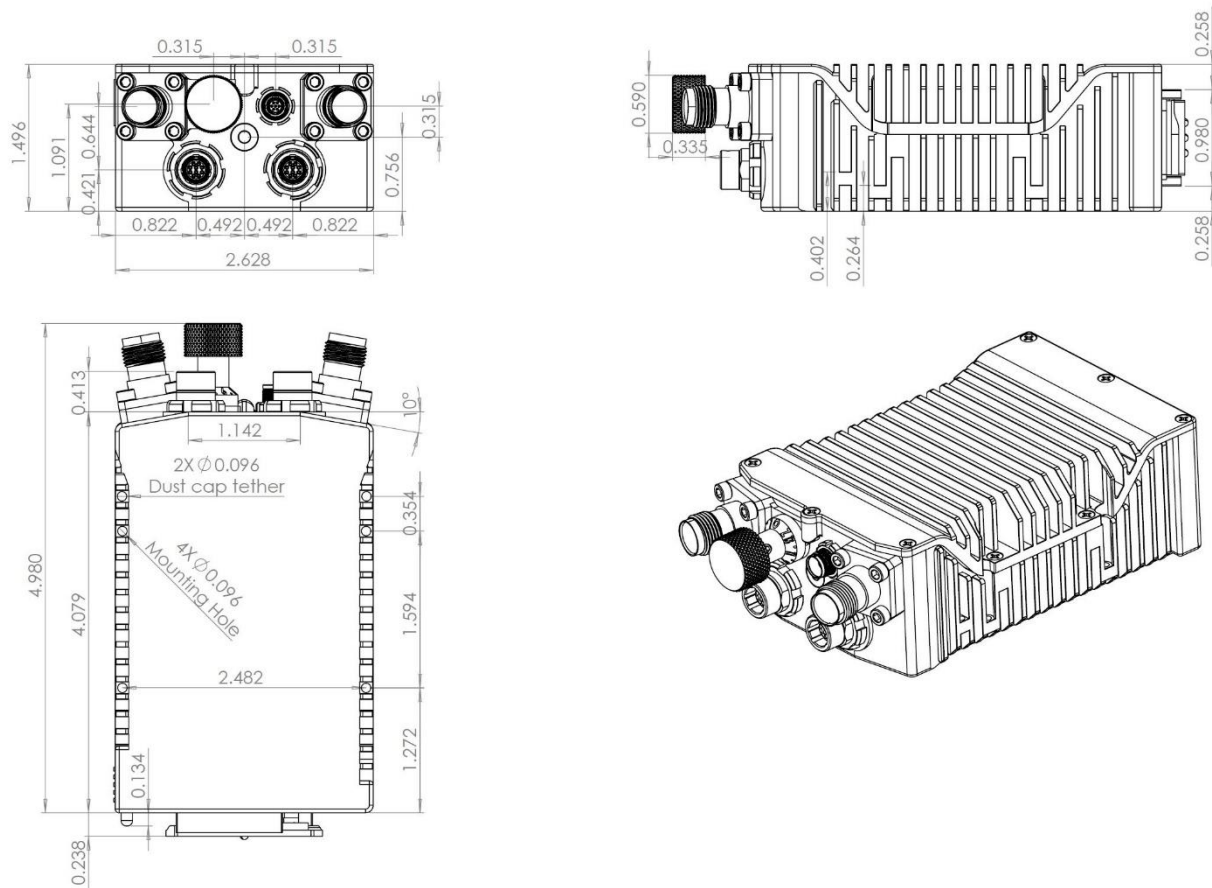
SC4200EP Mechanical Drawing (top) and Mounting Pattern (bottom)
